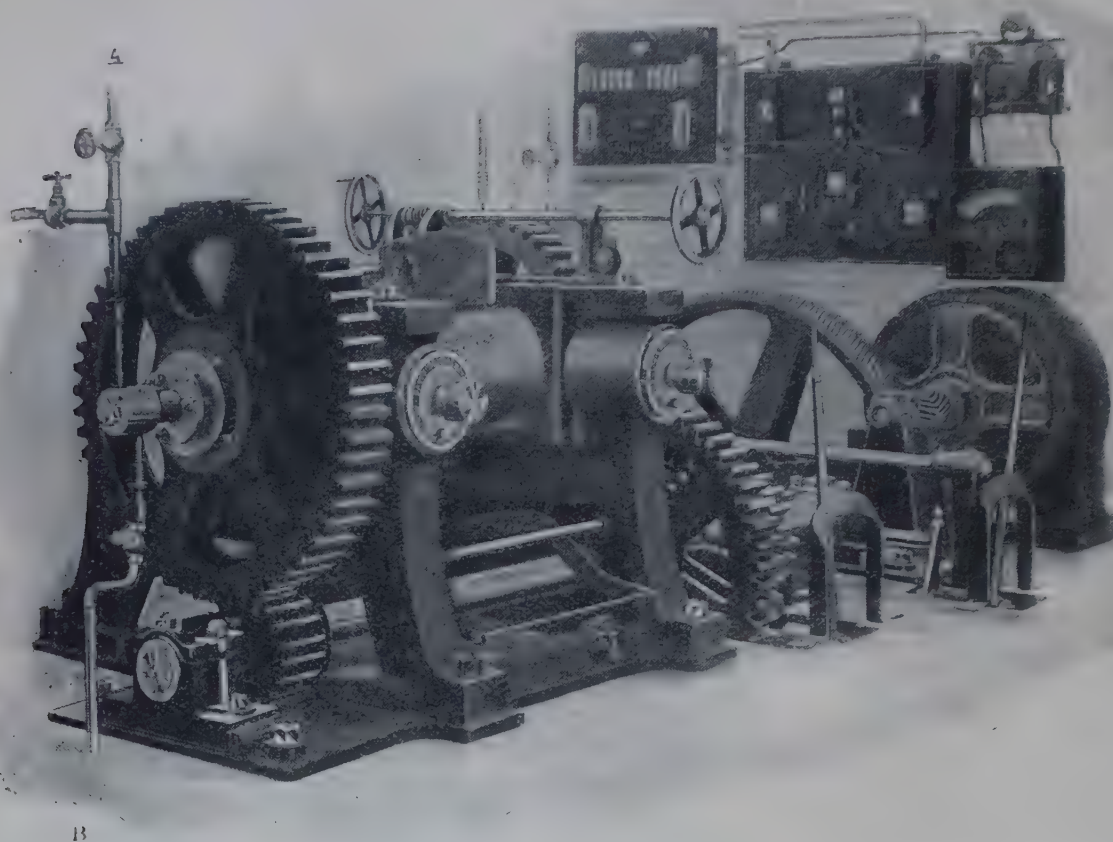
Grinder and Mixer. (David Bridge & Co., Castleton, Manchester.)
